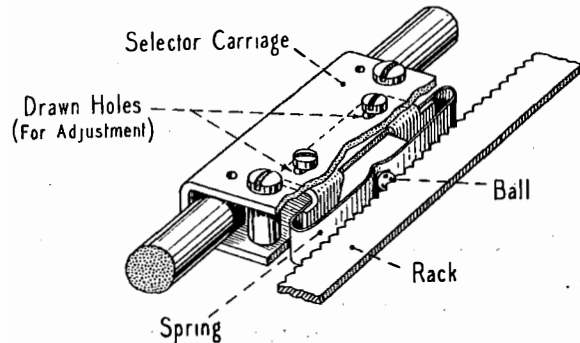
SLIDING CARRIAGE LOCATING DEVICE.
